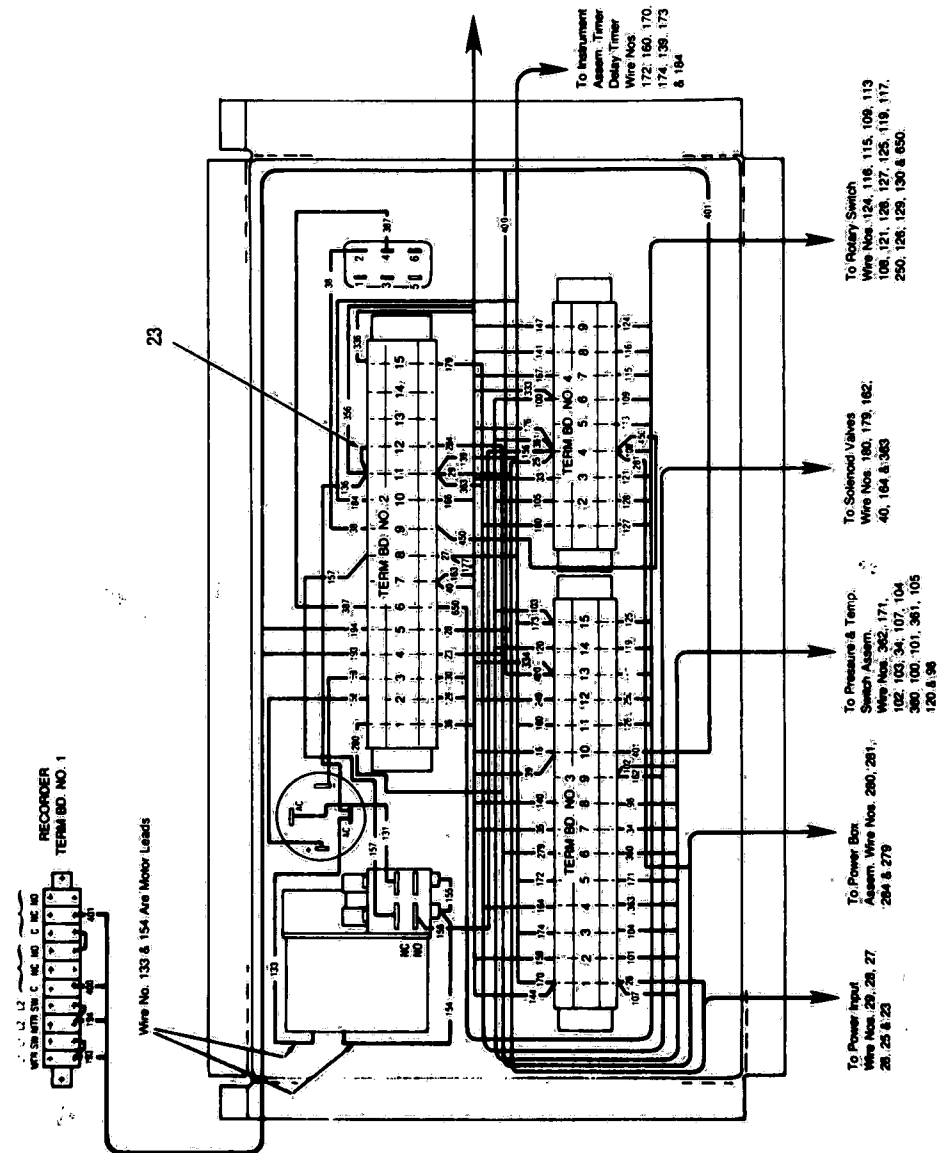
POWER SWITCH RECEPTACLE ASSEMBLY (For Units Shipped After 9/76) — SHEET 2 OF 3.
